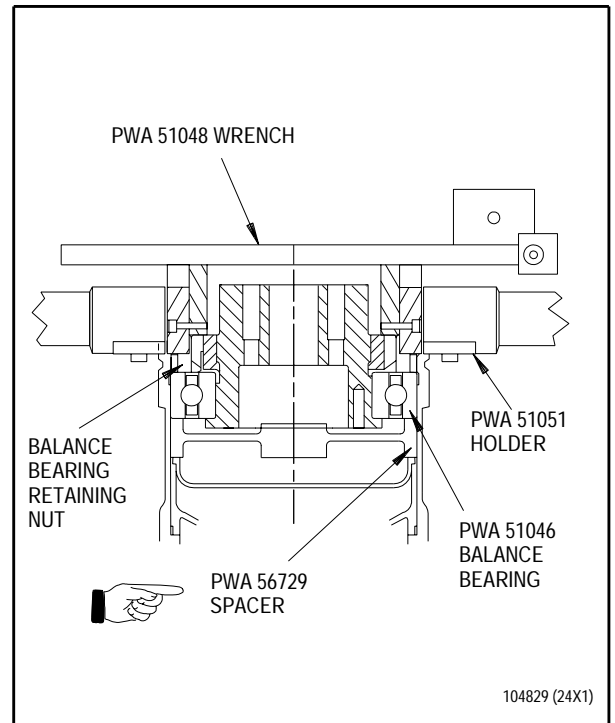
Front Compressor Drive Turbine Rotor and Stator Assembly - Balancing Tooling Removal (Sheet 5 of 6)
